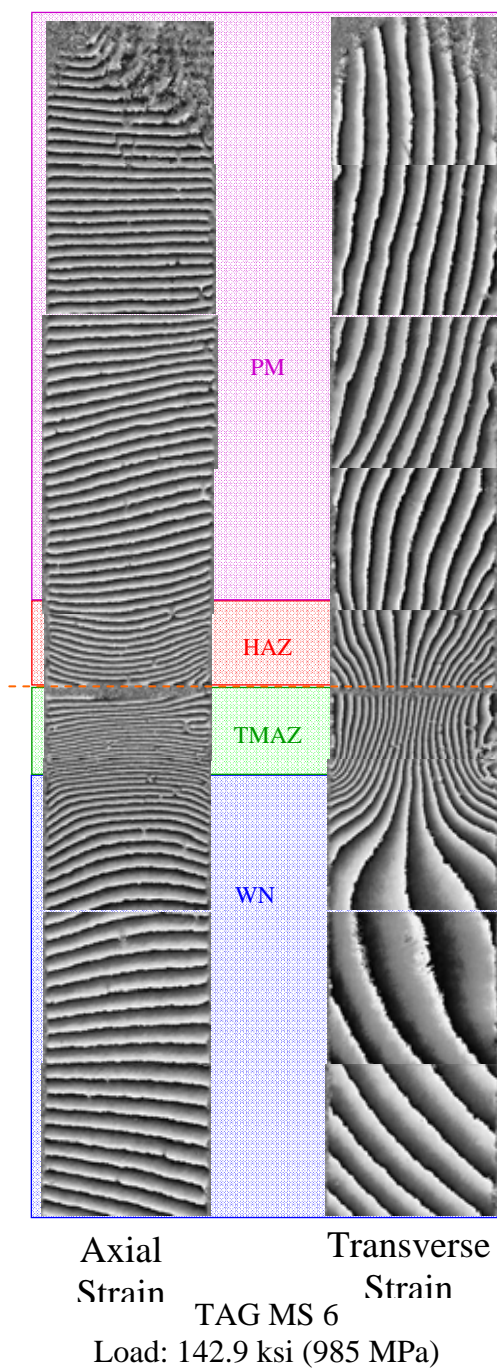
TAG MS 6 retreating side weld detail step 1
